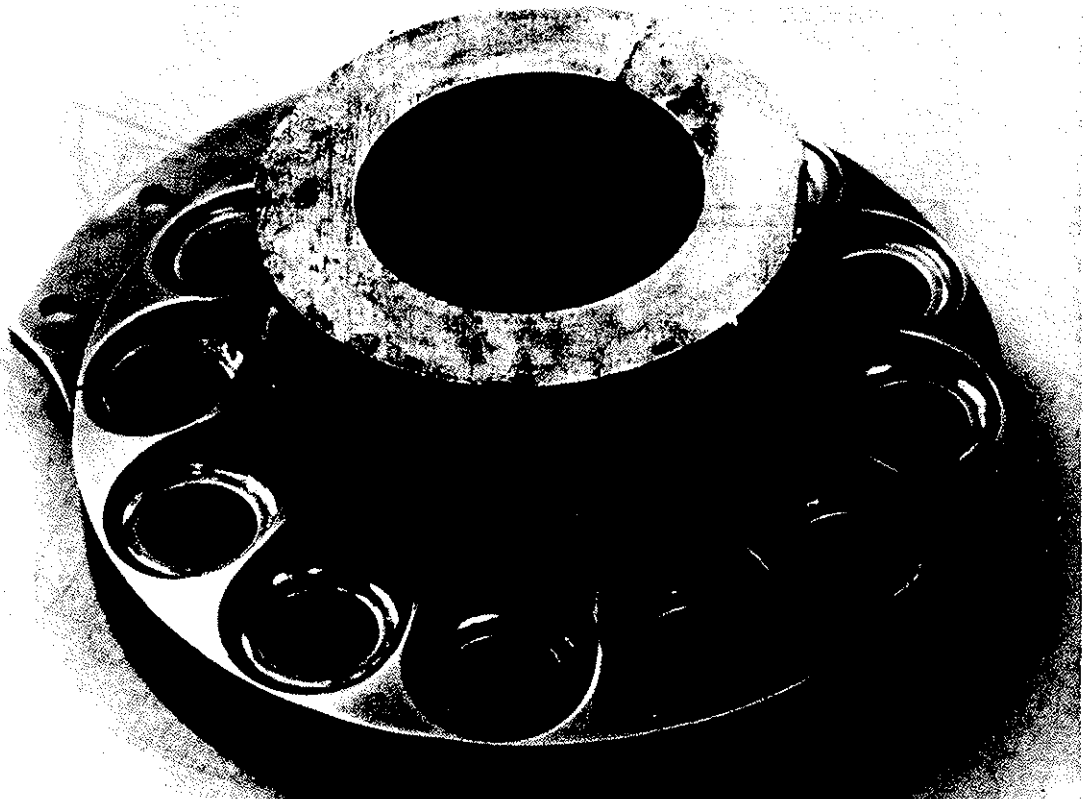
Rotor Shaft Flange of the Helicopter BO 105
